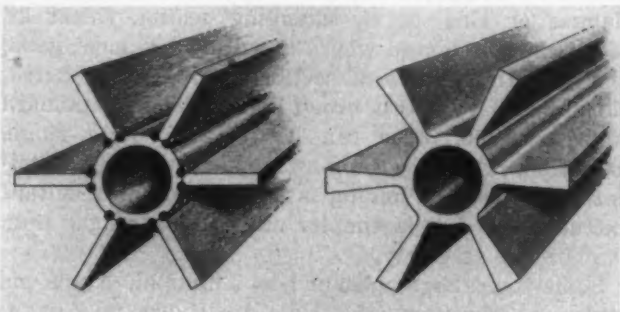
Welded assembly may be redesigned for extrusion at right, reducing cost and increasing strength
